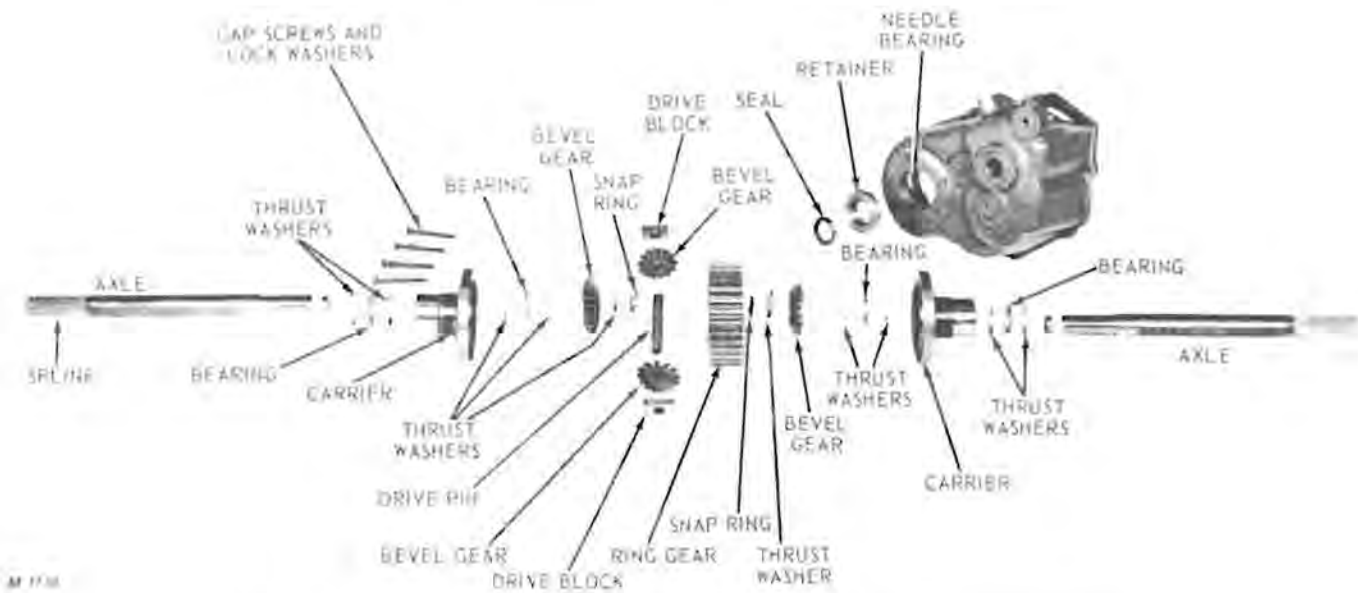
Exploded View of Differential Assembly - 110 and 112 Tractors (15001-100,000)
